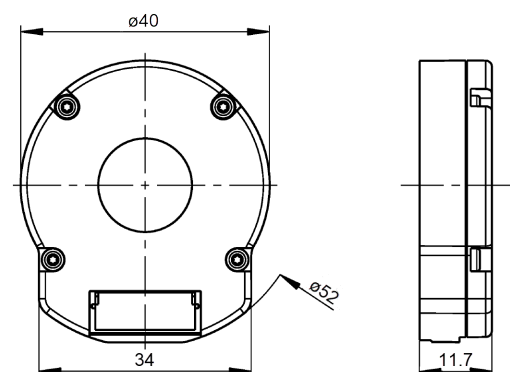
TSX 40 RIO on EC-i - dimension drawing
